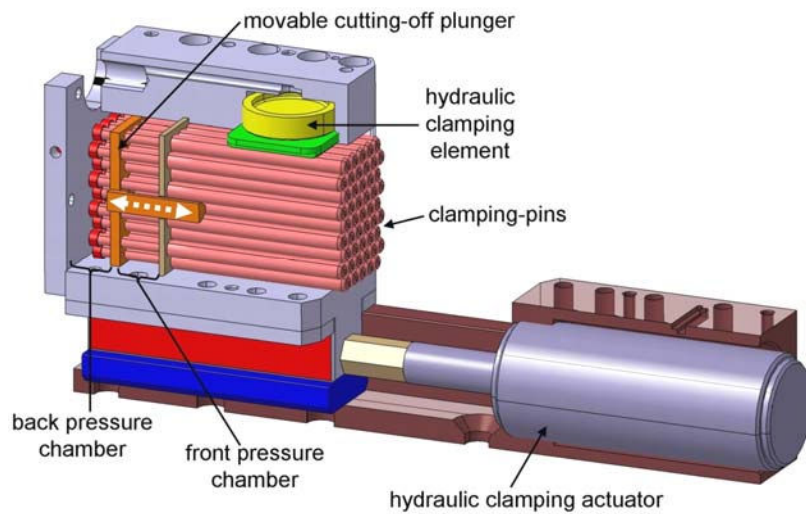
Sectional view of the movable clamping jaw and the clamping jaw base
